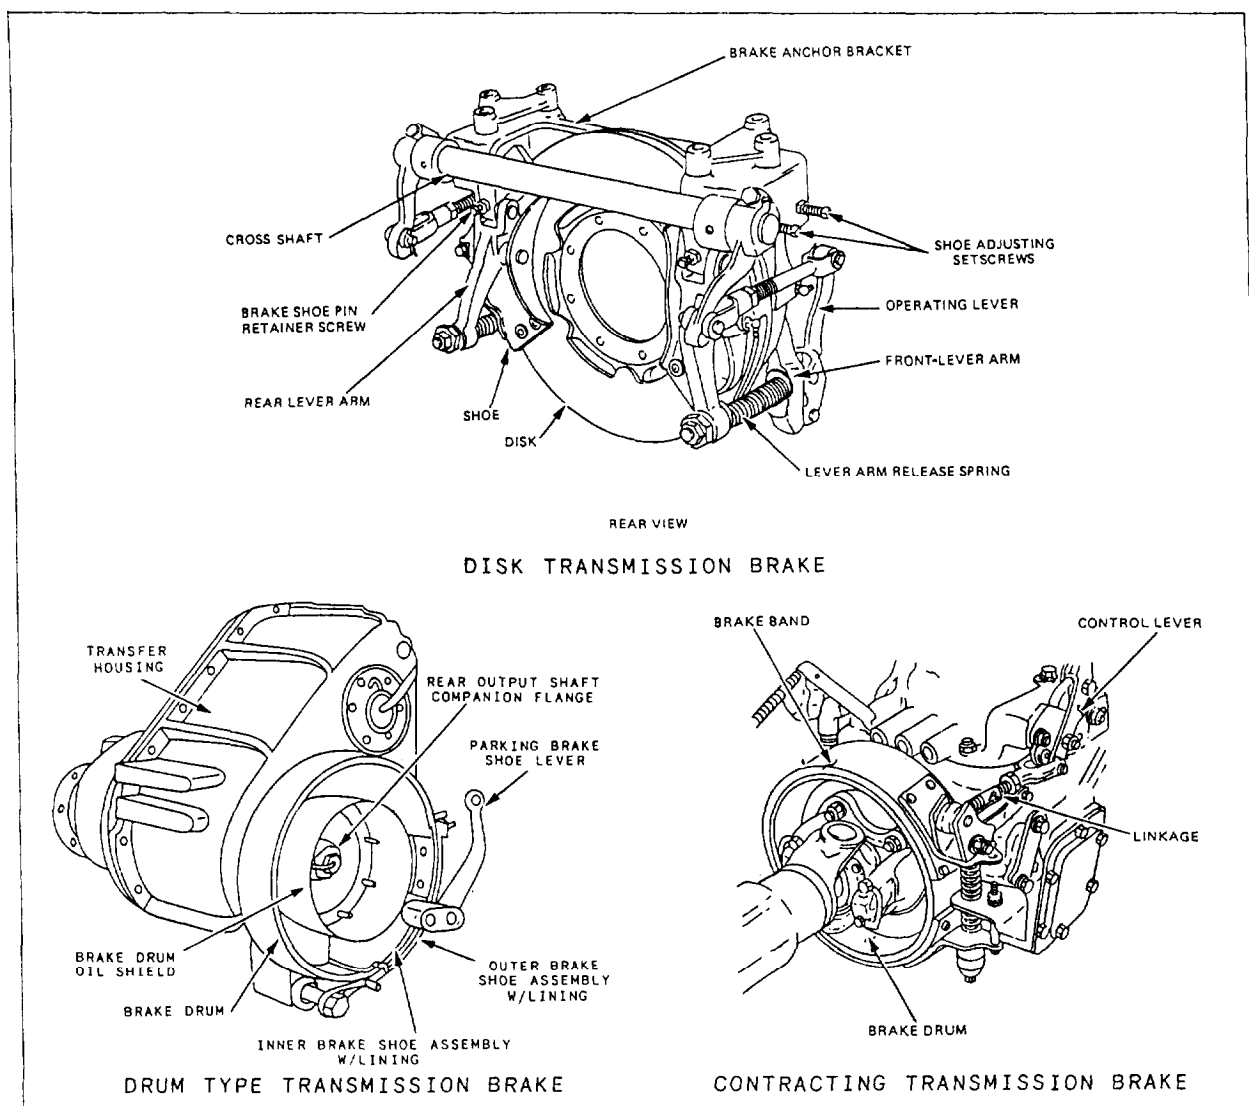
Examples of drive line emergency/parking brakes, transmission mounted.
